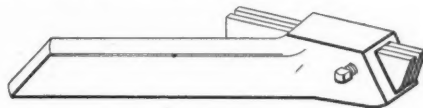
Mingst Double Cutting-off Tool-holder for Rings.
